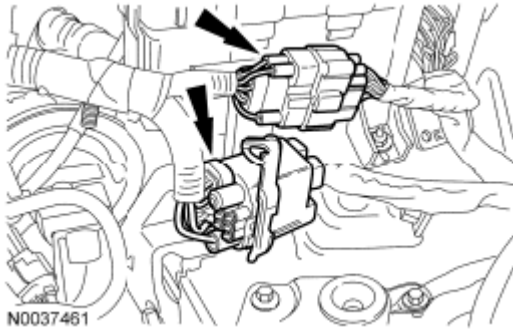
Locating Engine Wiring Harness Electrical Connectors
